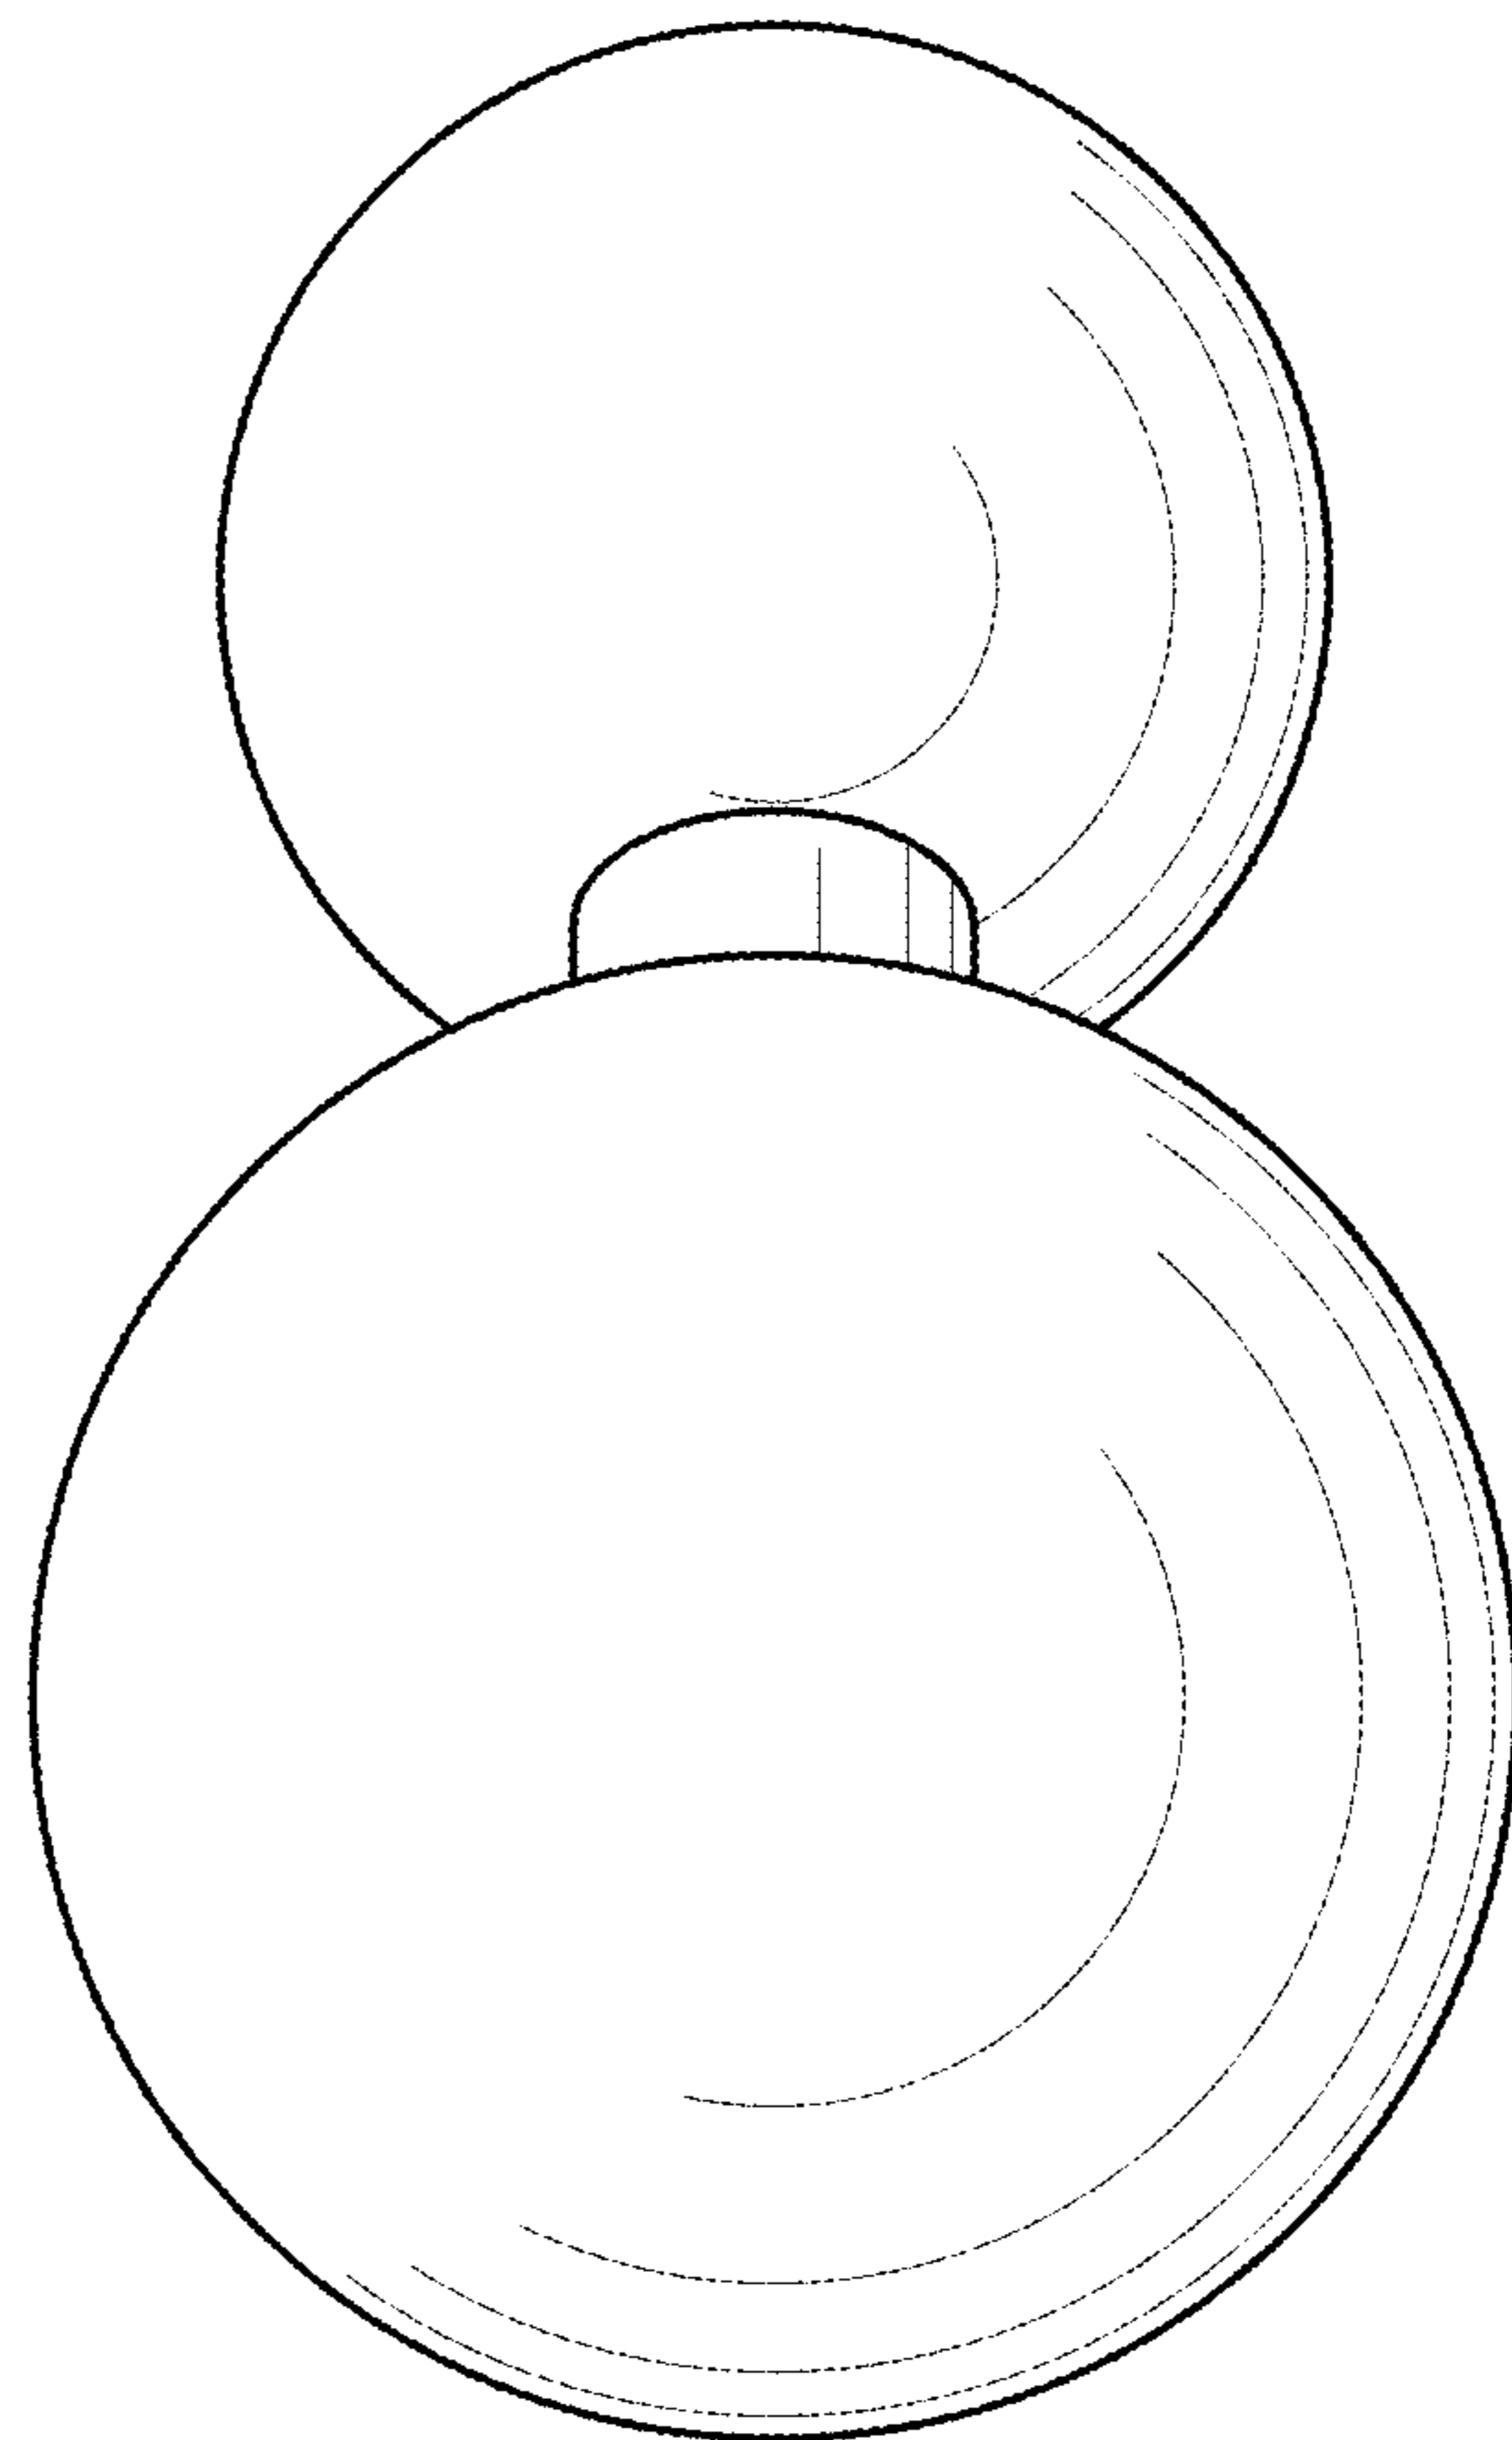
is a perspective view showing the front, top, and left sides of the puppet double ball joint;
